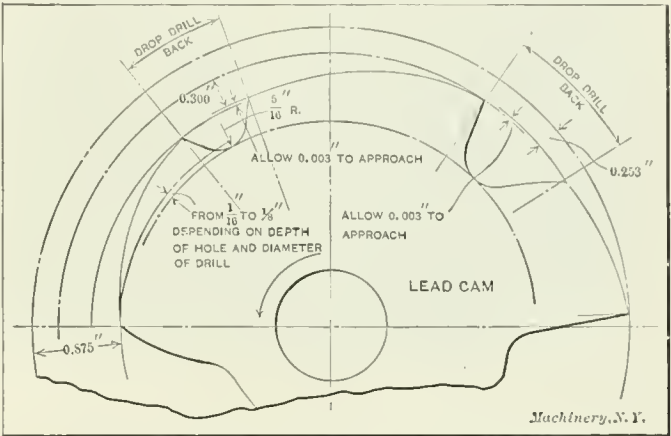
Method of Laying out Cams for Deep-hole Drilling
